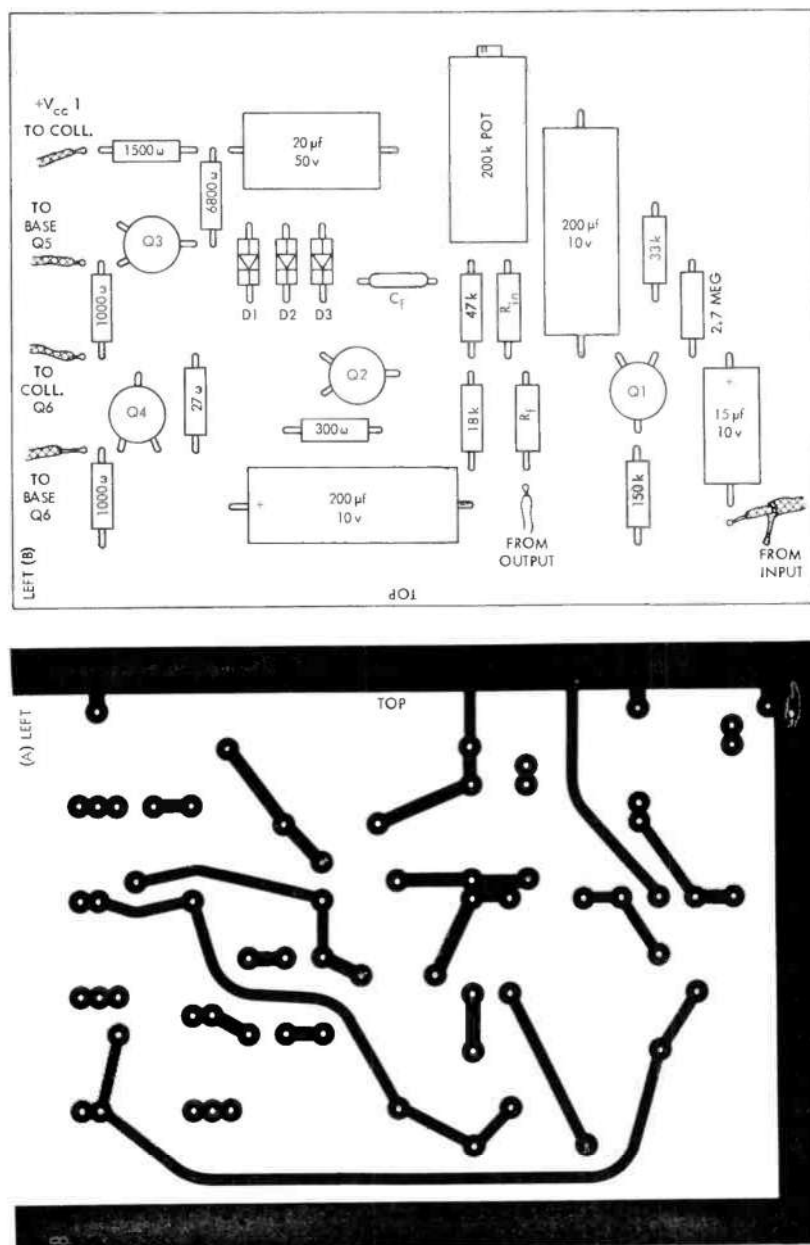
(A) Printed circuit board for one amplifier (foil side shown); (B) parts placement. Note location of top and left
